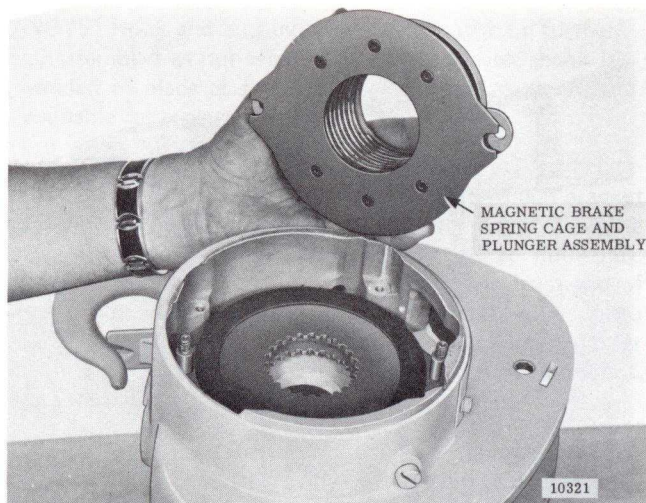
Removing Magnetic Brake Spring Cage and Plunger Assembly
